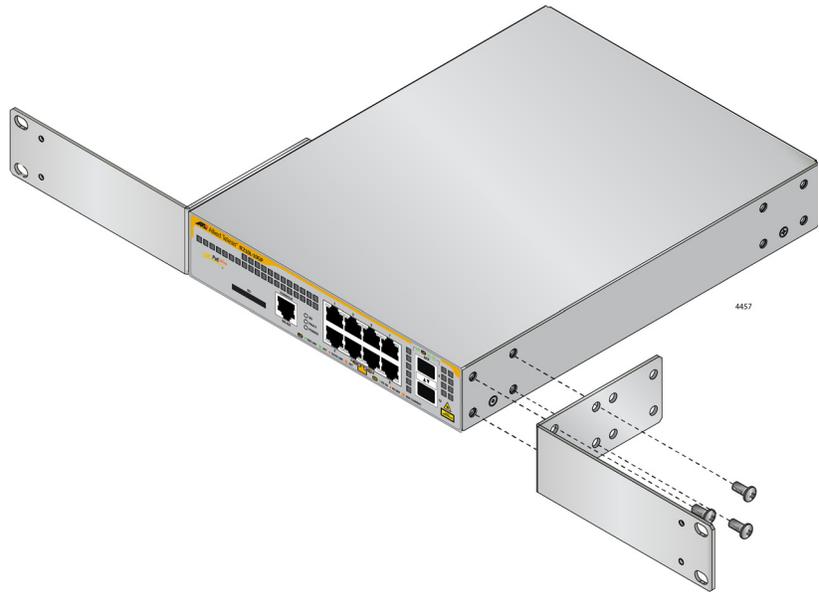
Attach Rack Mount Brackets to AT-IE210L-10GP Switch
